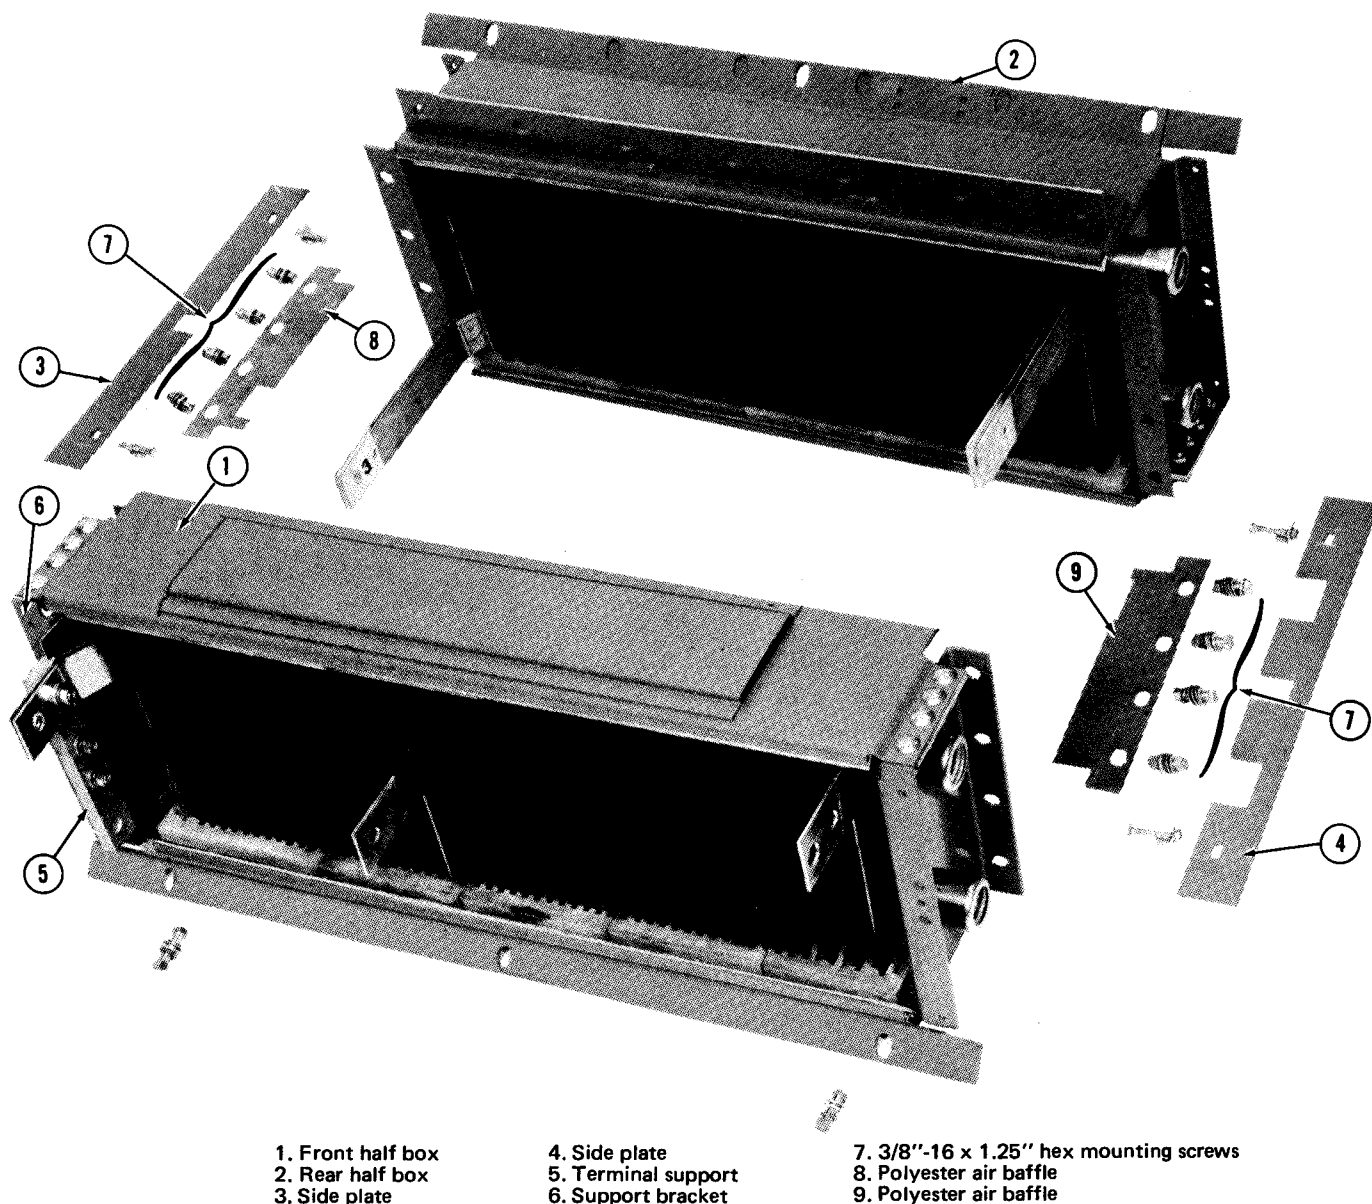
Exploded View Dynamic Brake Grid Resistor
